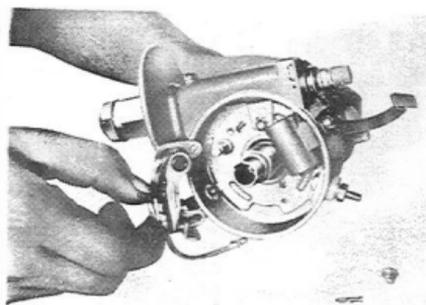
Removing Breaker W0863 Arm & Point Plate
